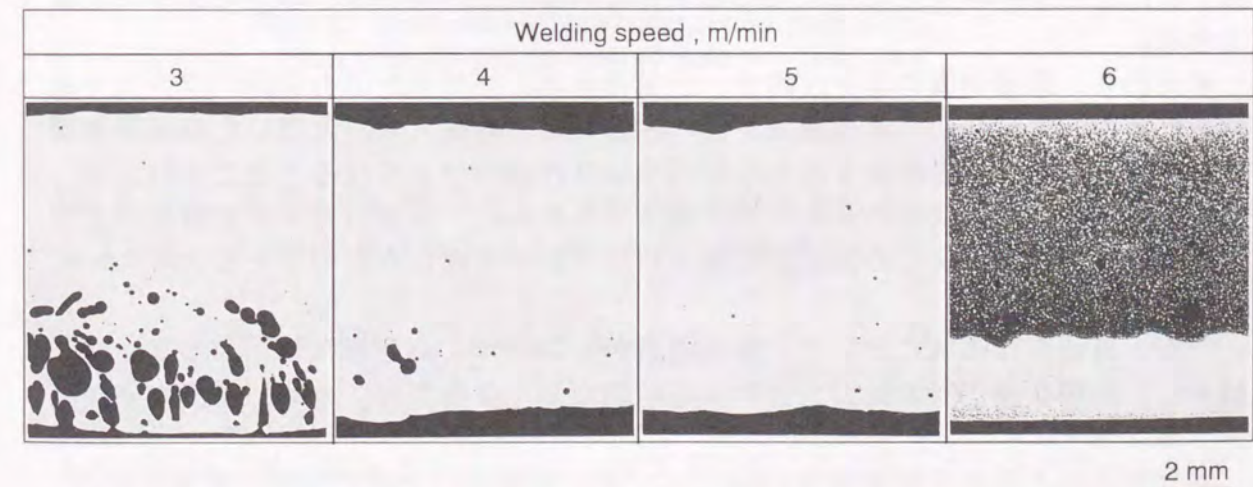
Effect of welding speed on blow hole generation in longitudinal macrosections of laser weld metals
